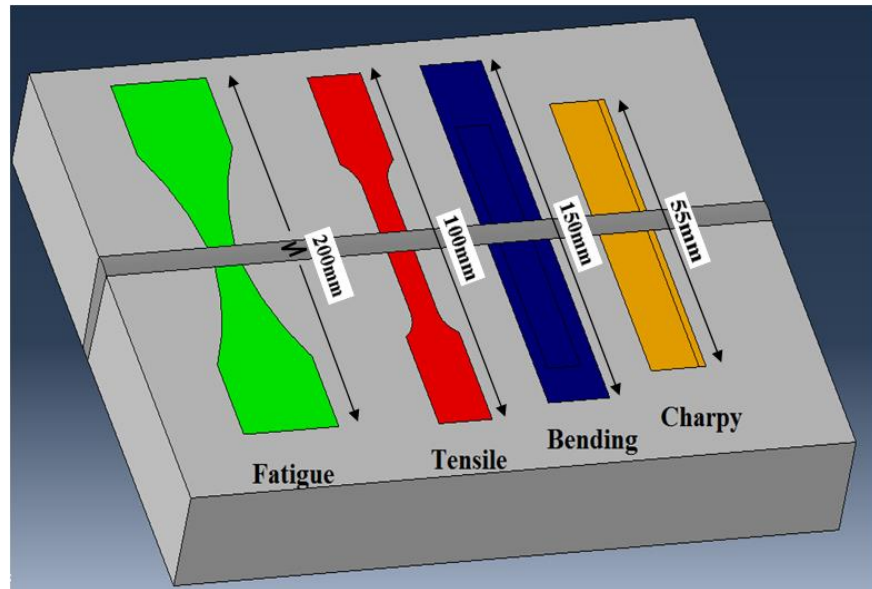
Position of testing samples with respect to weld bead
